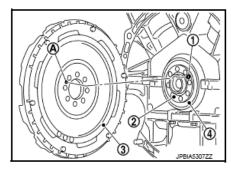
Identifying Crankshaft, Flywheel, Dowel Pin And Rear Oil Seal Courtesy of NISSAN NORTH AMERICA, INC.
